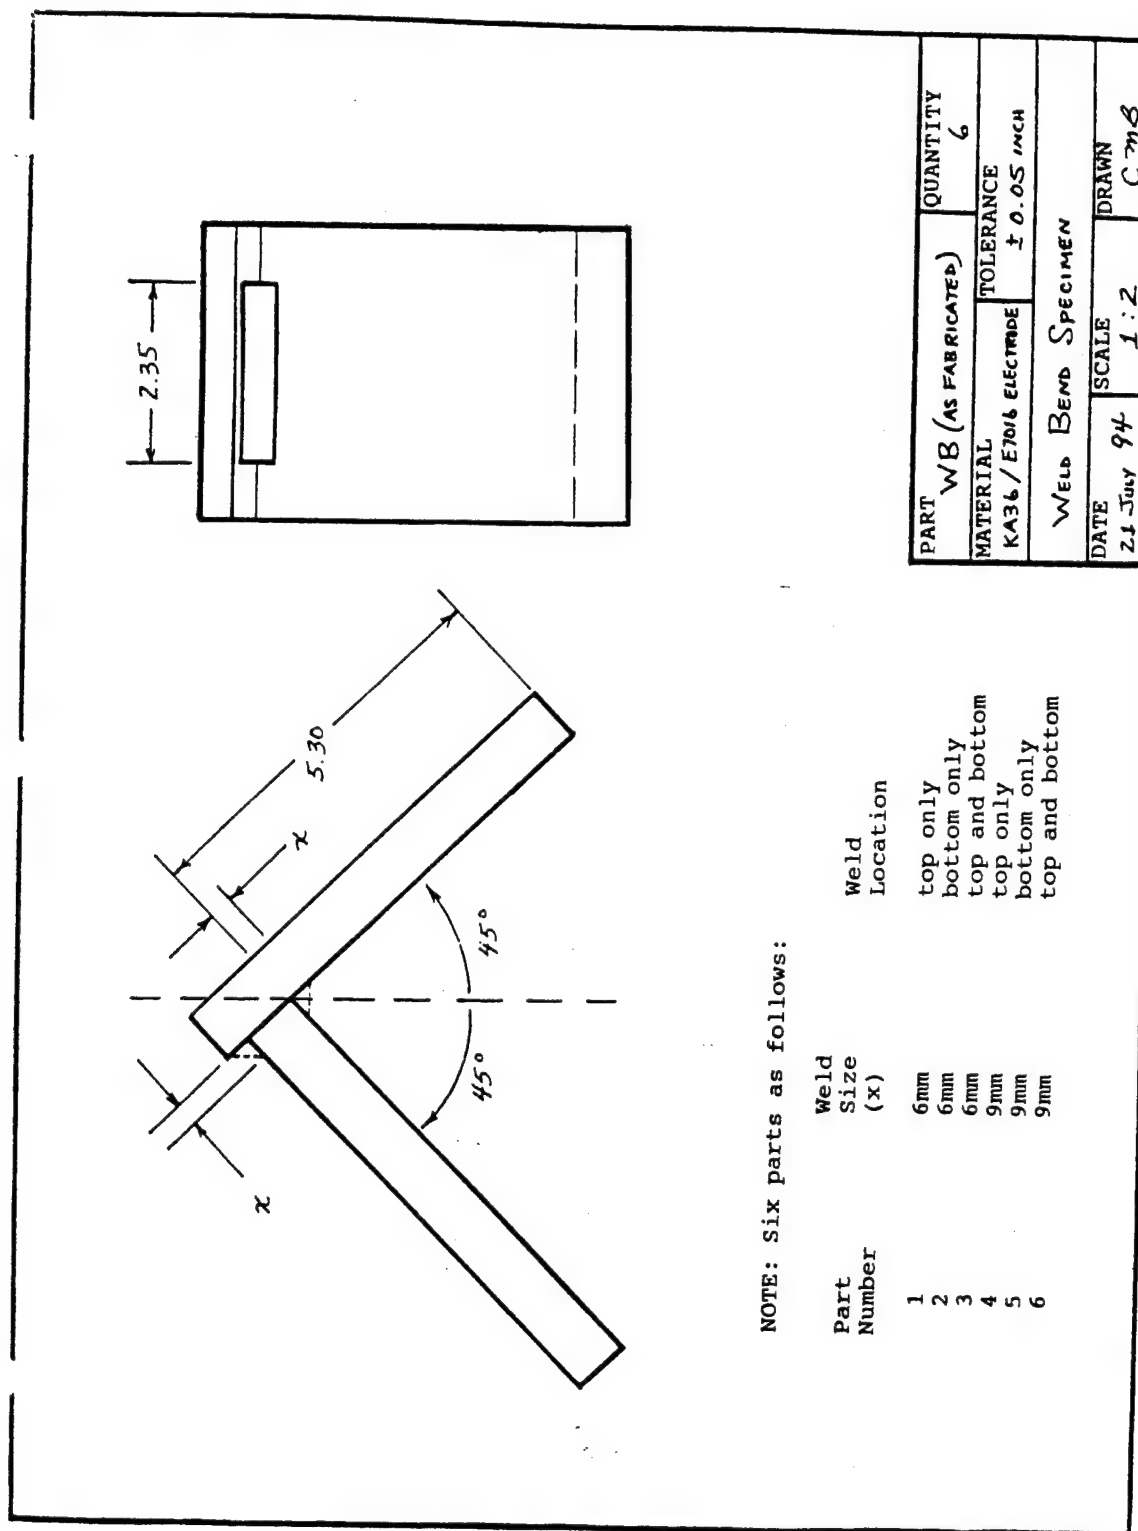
Representative Machine Drawing of Lazy-L Specimen
